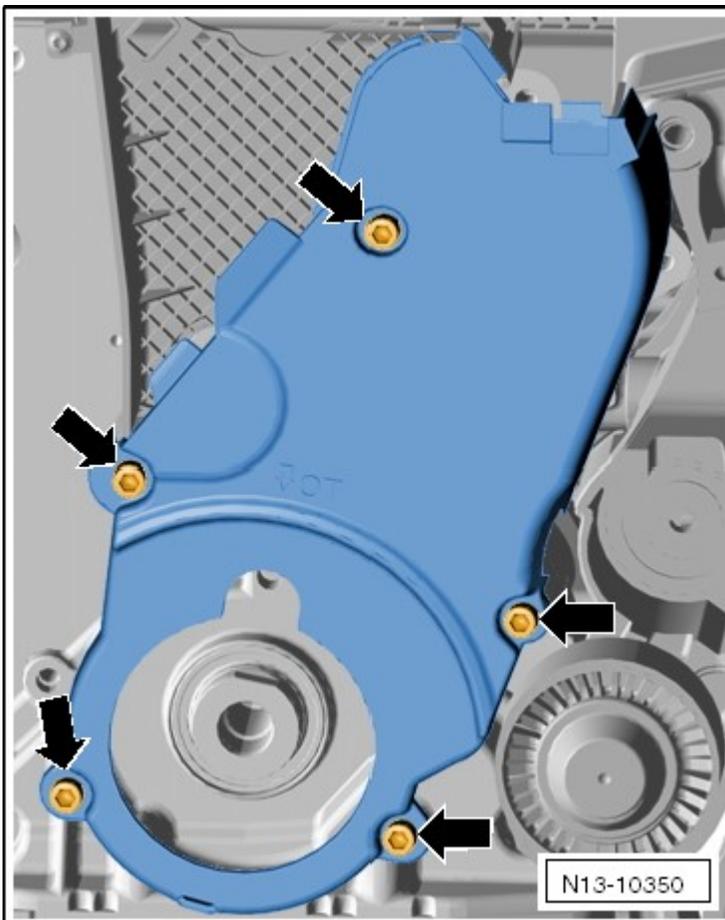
Identifying Lower Toothed Belt Guard And Bolts -Arrows-
